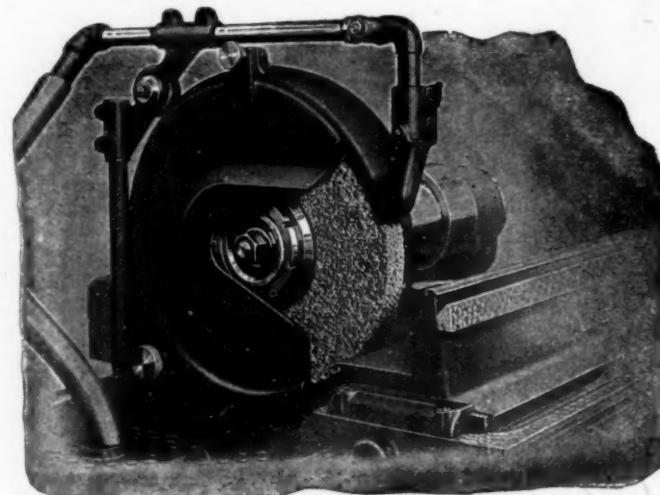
PROTECTION HOOD USED ON NORTON PLAIN GRINDING MACHINE.
